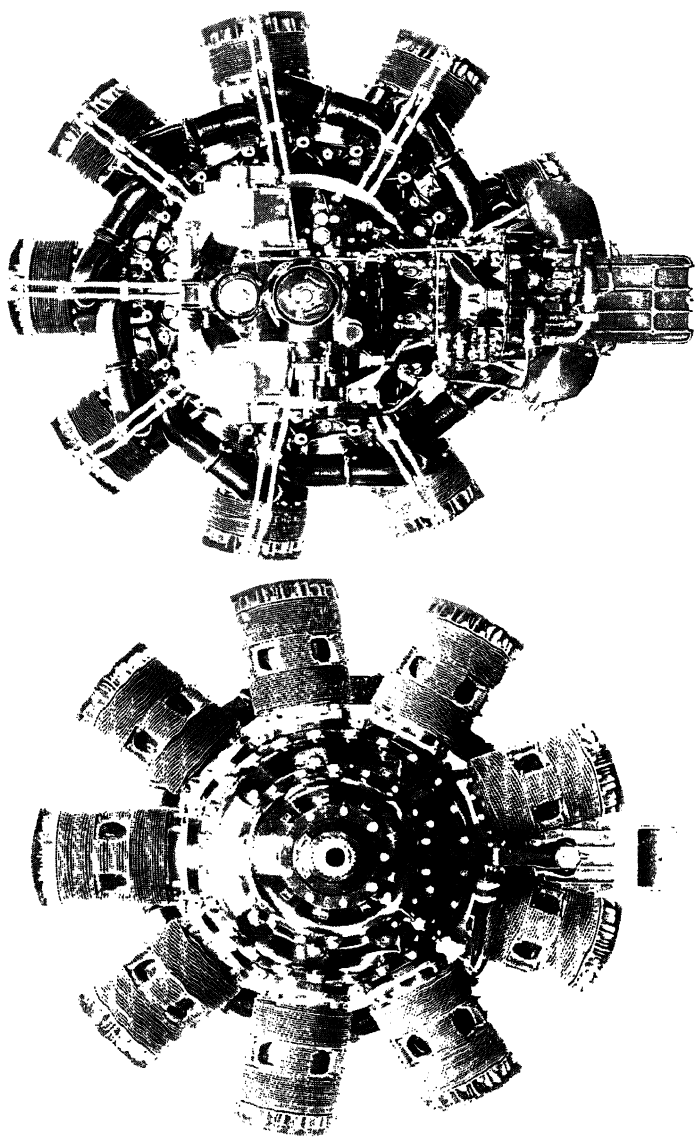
Front and rear views of Bristol "Perseus XII" sleeve valve engine.
